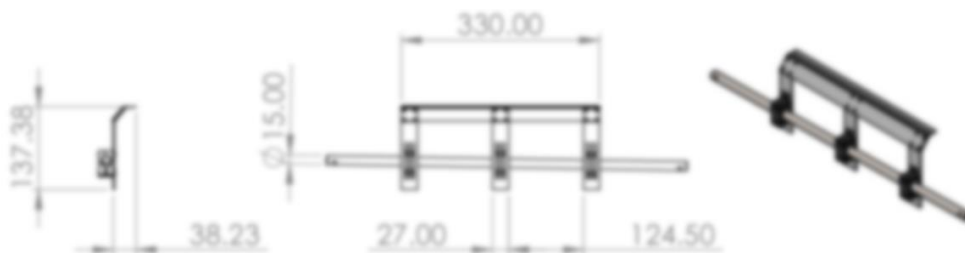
Mechanical Design and Dimensions of The Fiber Removal Blade
